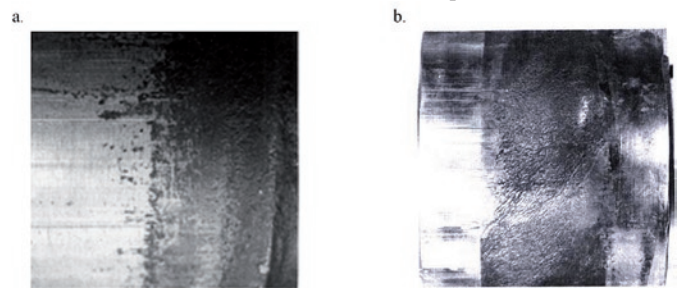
Fretting wear at the edge of axle wheel seat: a) traditional wheel set [2], b) wheel set with automatic wheel track change [13]
